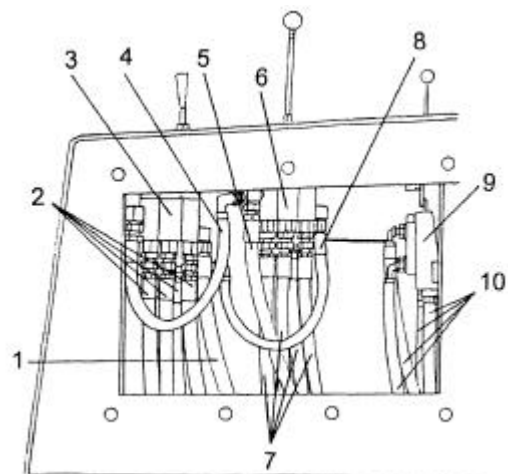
Mounted Equipment Steering Disconnecting Points
